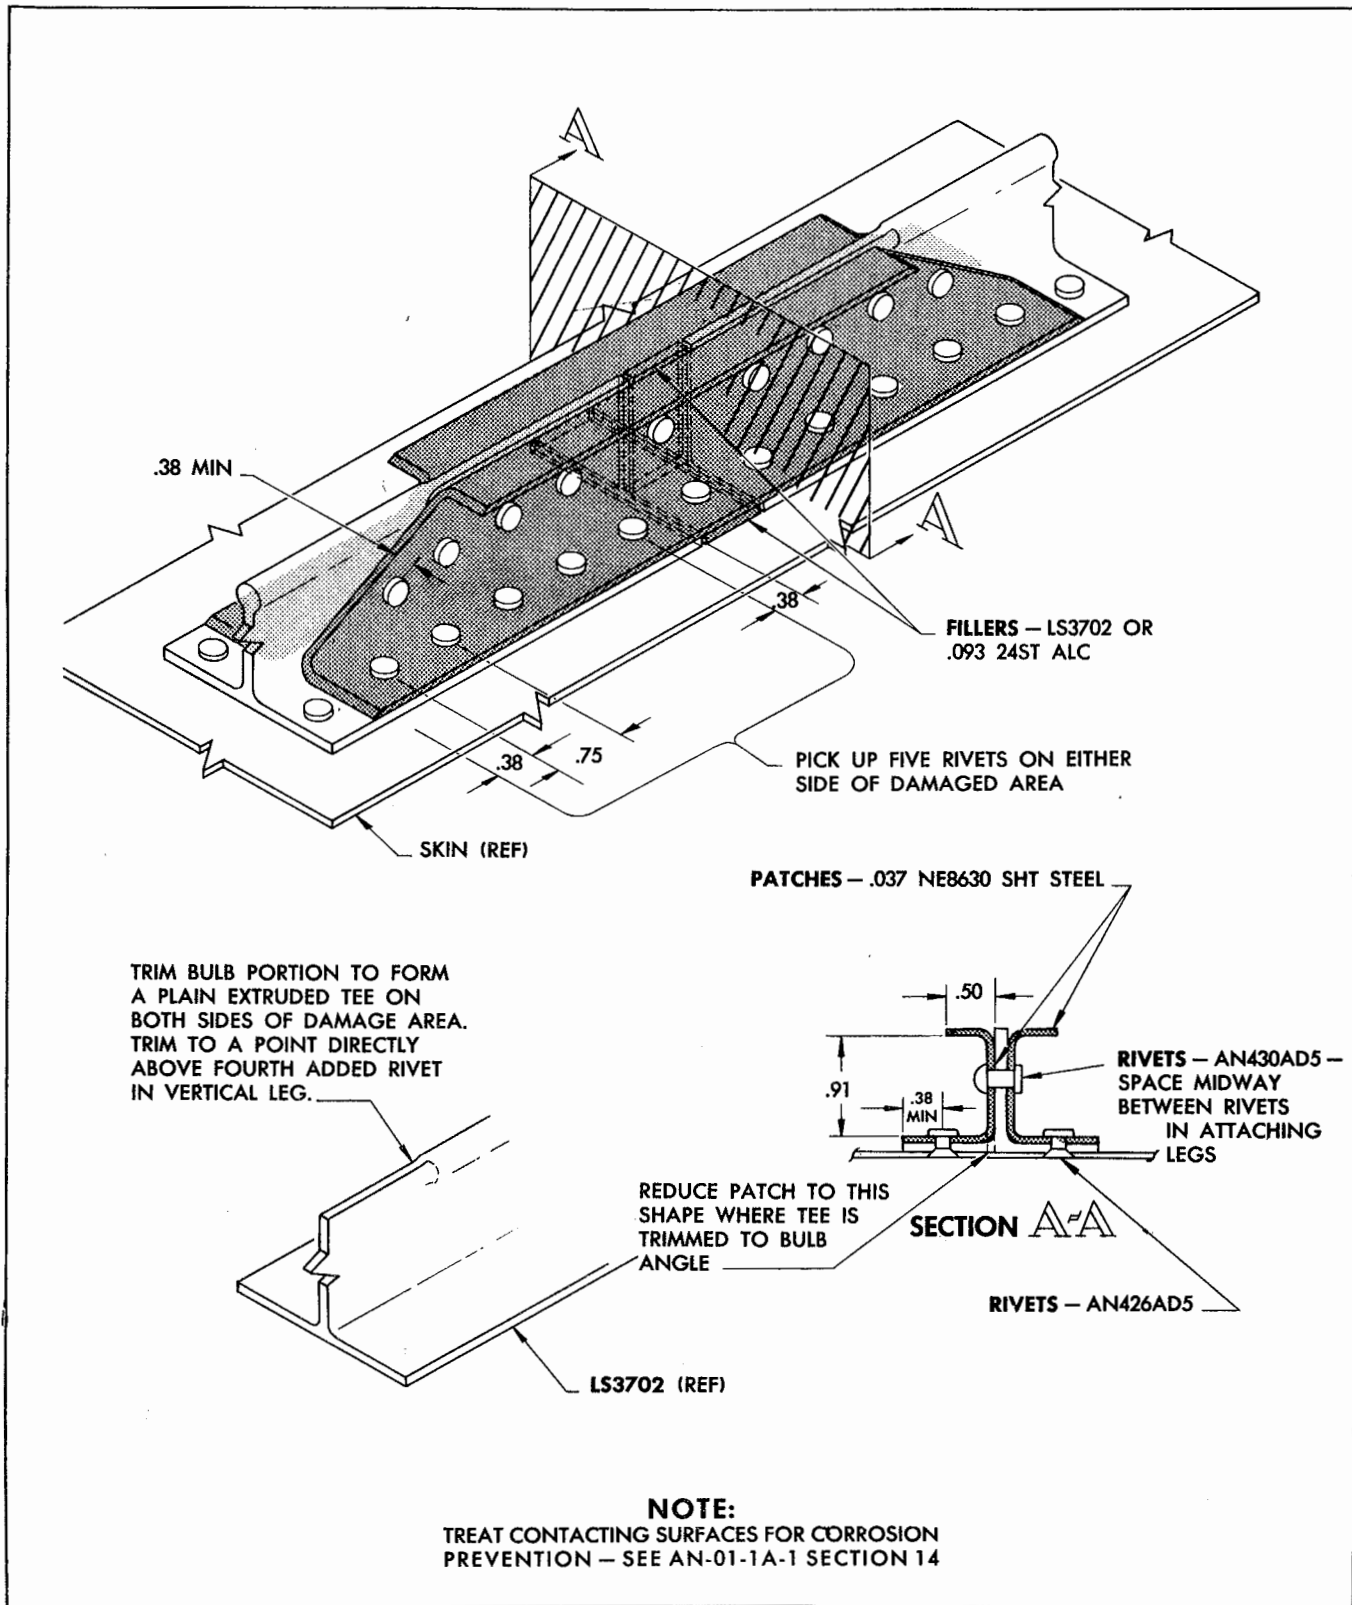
A — Stringer Repair (Alternate) — Upper Surface
